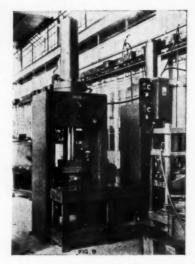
Hydraulic press of the type used in molding high tension magneto parts.
